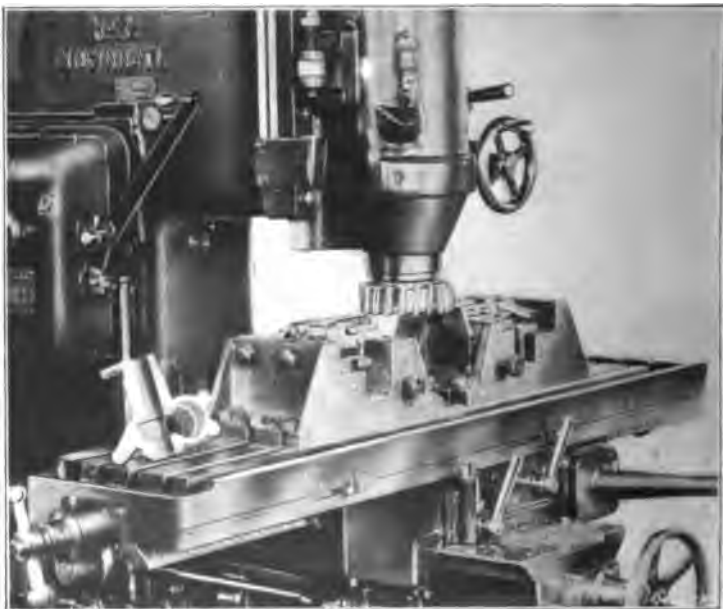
Machine Equipped with Two Work-holding Fixtures so that One Casting can be Chucked while the Other is being Milled
